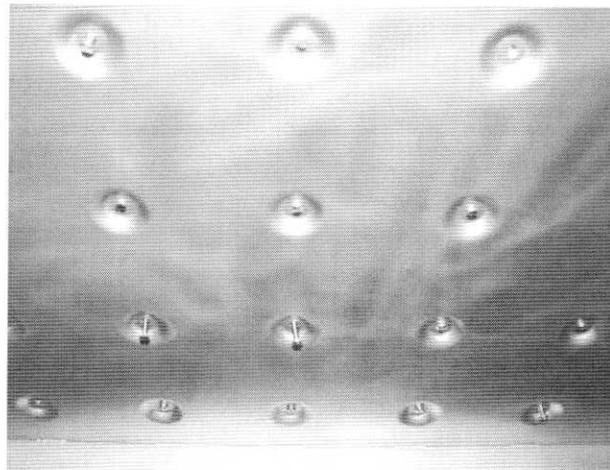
DETAILS OF THE M4 SCREWS USED TO FIX THE PDS ALUMINUM FIXTURE TO THE CHAMBER COLD PLATE.
